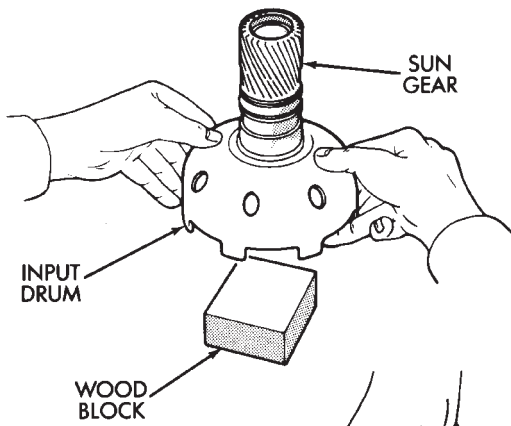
Removing/Installing Sun Gear Seal Rings
